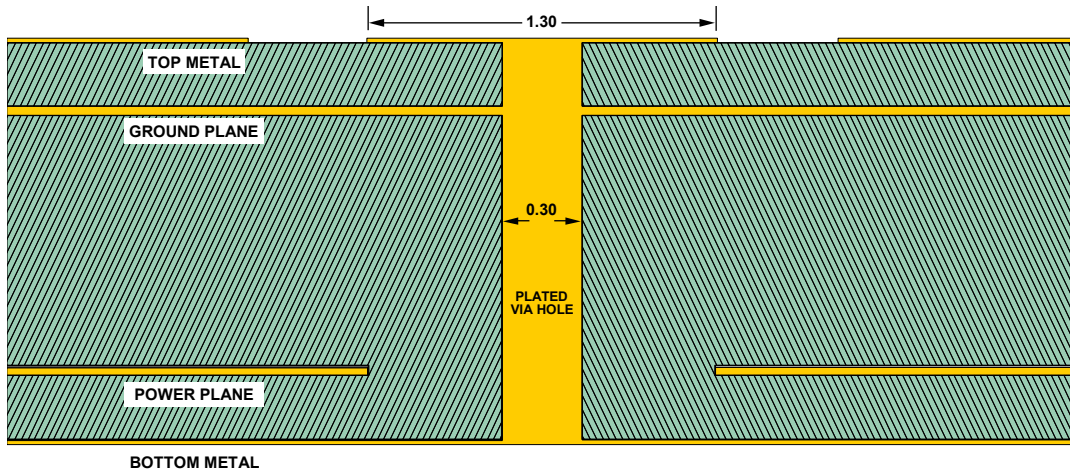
Cross-Section of 4-Layer PCB Showing Thermal Via Connection to Buried Ground Plane (Dimensions in Millimeters)
